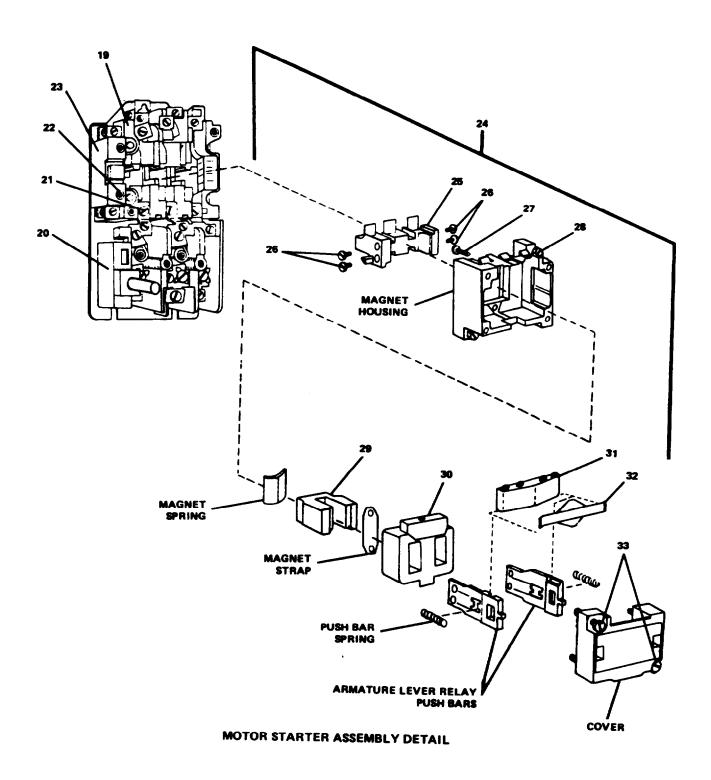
Motor Controller. Engine Room Supply Fan. Sheet 2 of 3.
